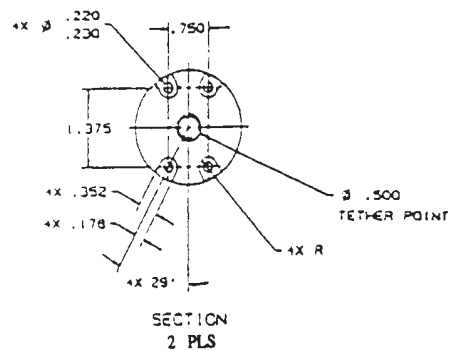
HANDRAIL/HANDHOLD CROSS SECTION (GROUND INSTALLED)
